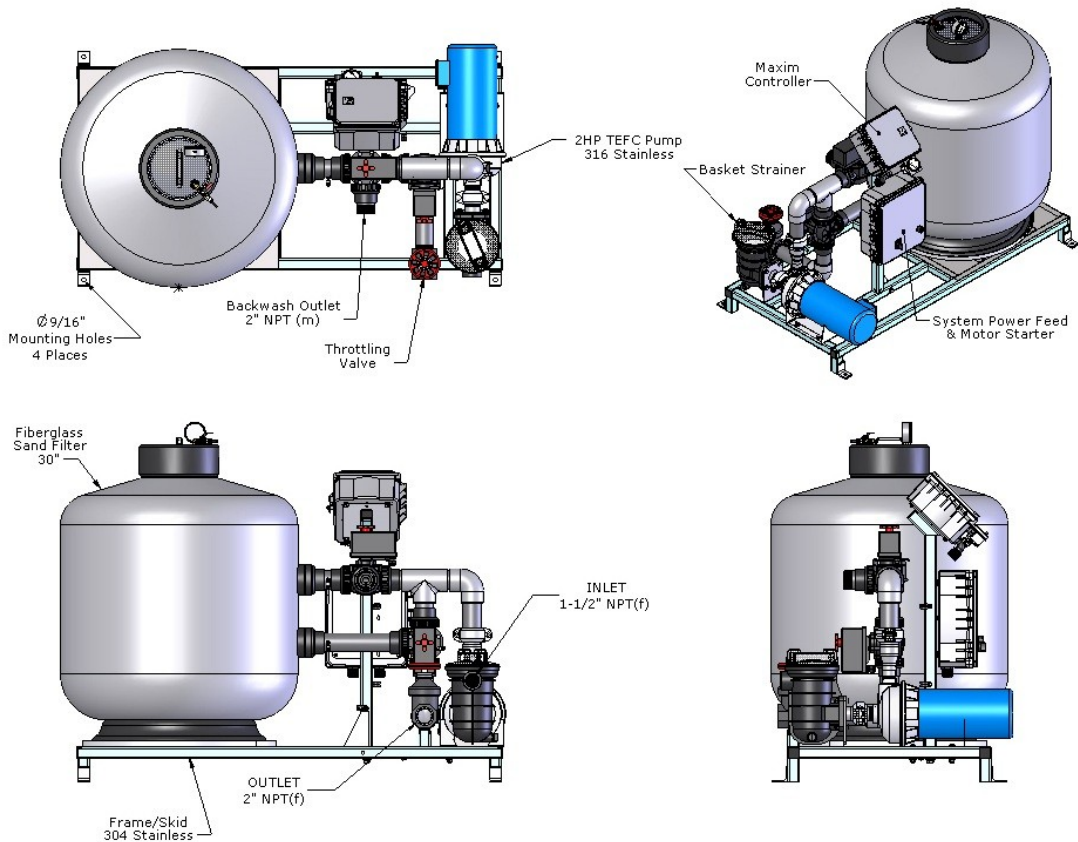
TowerGuard System Layout using the Tower Water backflush hookup.
